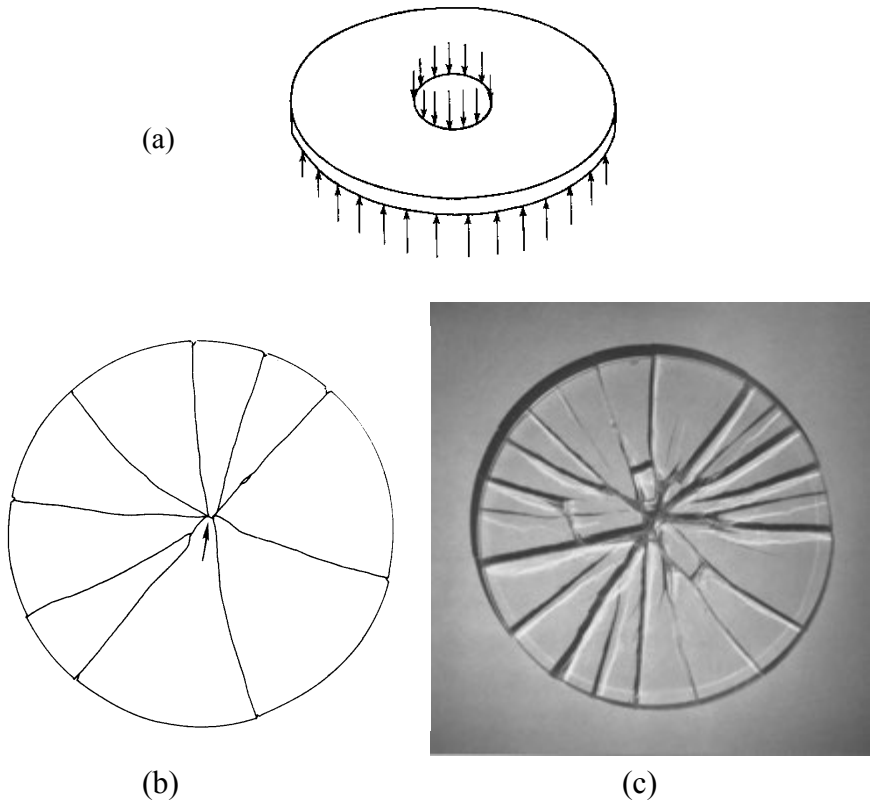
Fracture patterns in a moderately-strong glass disk tested in ring-on-ring biaxial strength test. (a) shows the test arrangement, (b) shows a schematic of a fracture pattern. The arrow marks the origin. (c) shows an example in a BK-7 borosilicate crown glass disk.
